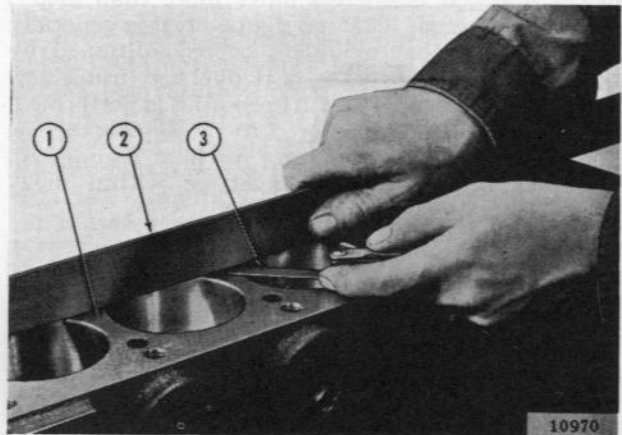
CHECKING CYLINDER BLOCK FOR DISTORTION
